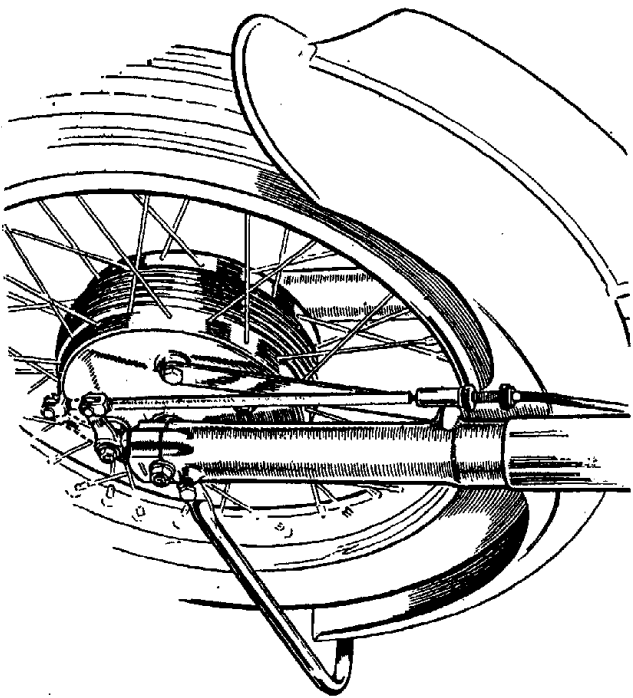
FRONT BRAKE ADJUSTMENT.
